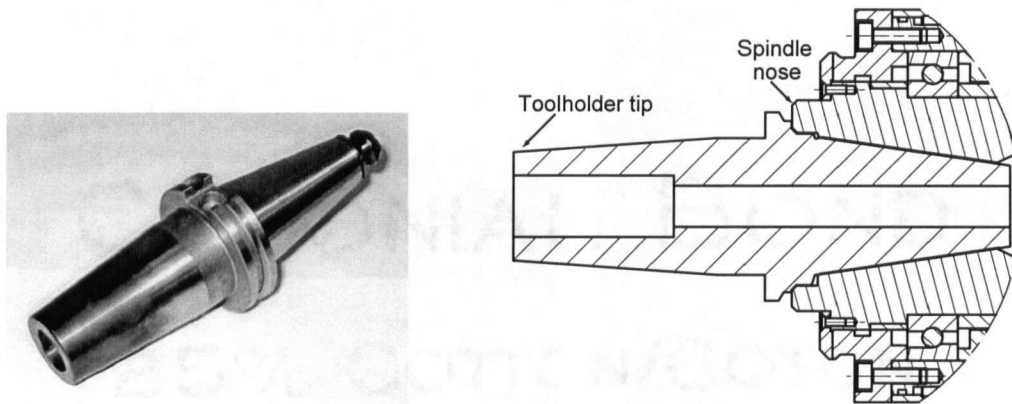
A shrink fit tool-holder and its connection to the spindle
